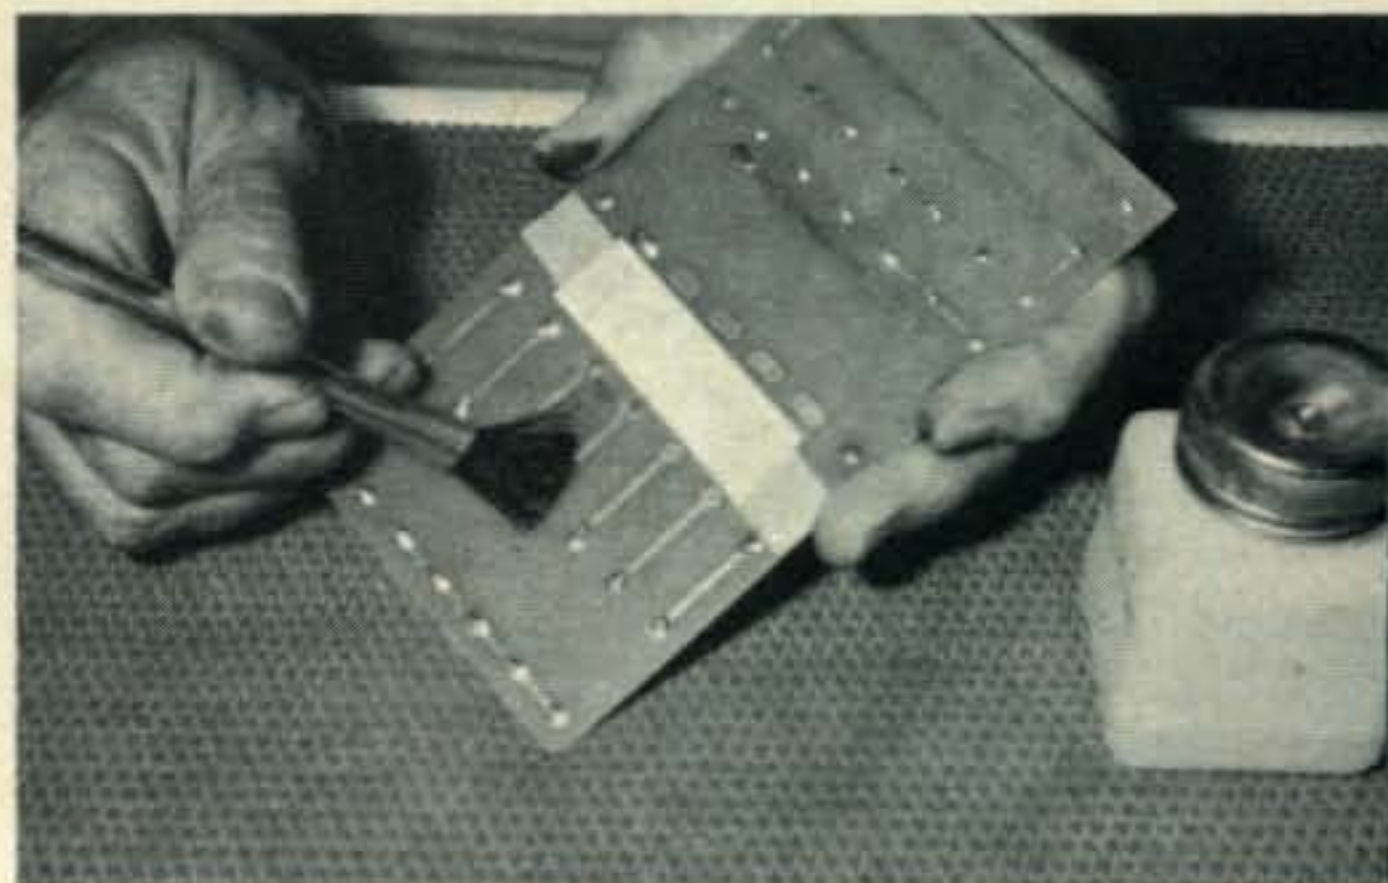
Scrubbing a solder connection with alcohol. Note the special alcohol container that requires pumping action.
